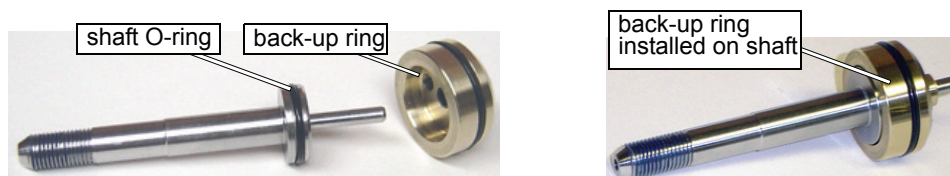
Insert the Back-up Ring onto the Shaft O-ring
